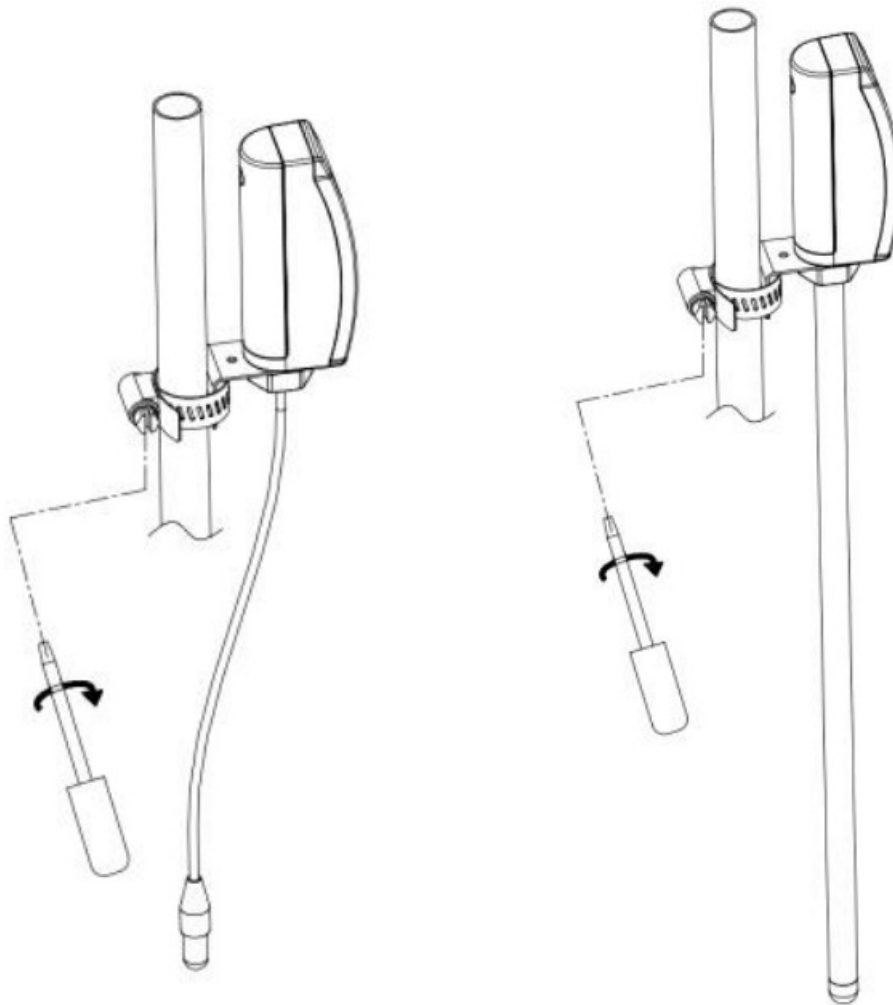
Sensor mounting to pole (left for the cabled version, right for the probe version)
